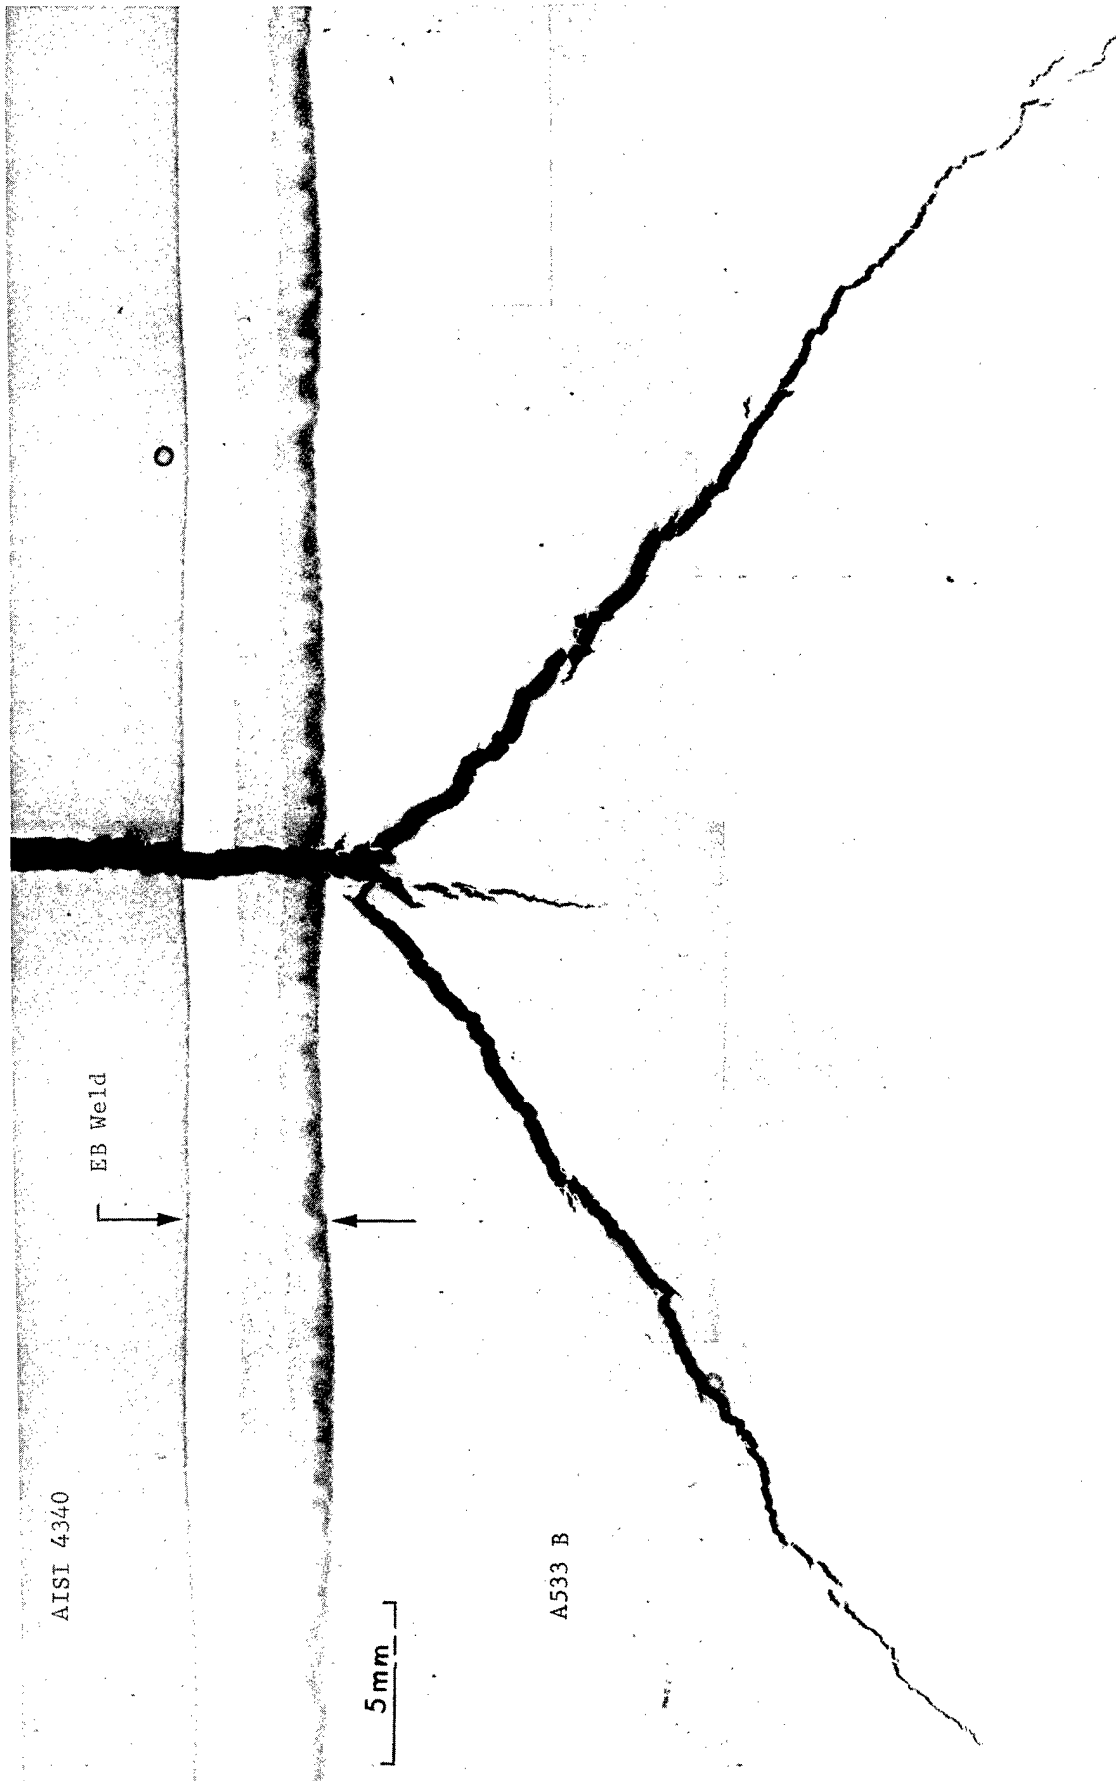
PROFILE OF BRANCHED FRACTURE ON PLATE MIDSECTION OF DUPLEX DCB SPECIMEN. The crack propagated from top to bottom and branched in the A533B steel after passing through the electron beam weld which remains intact.
